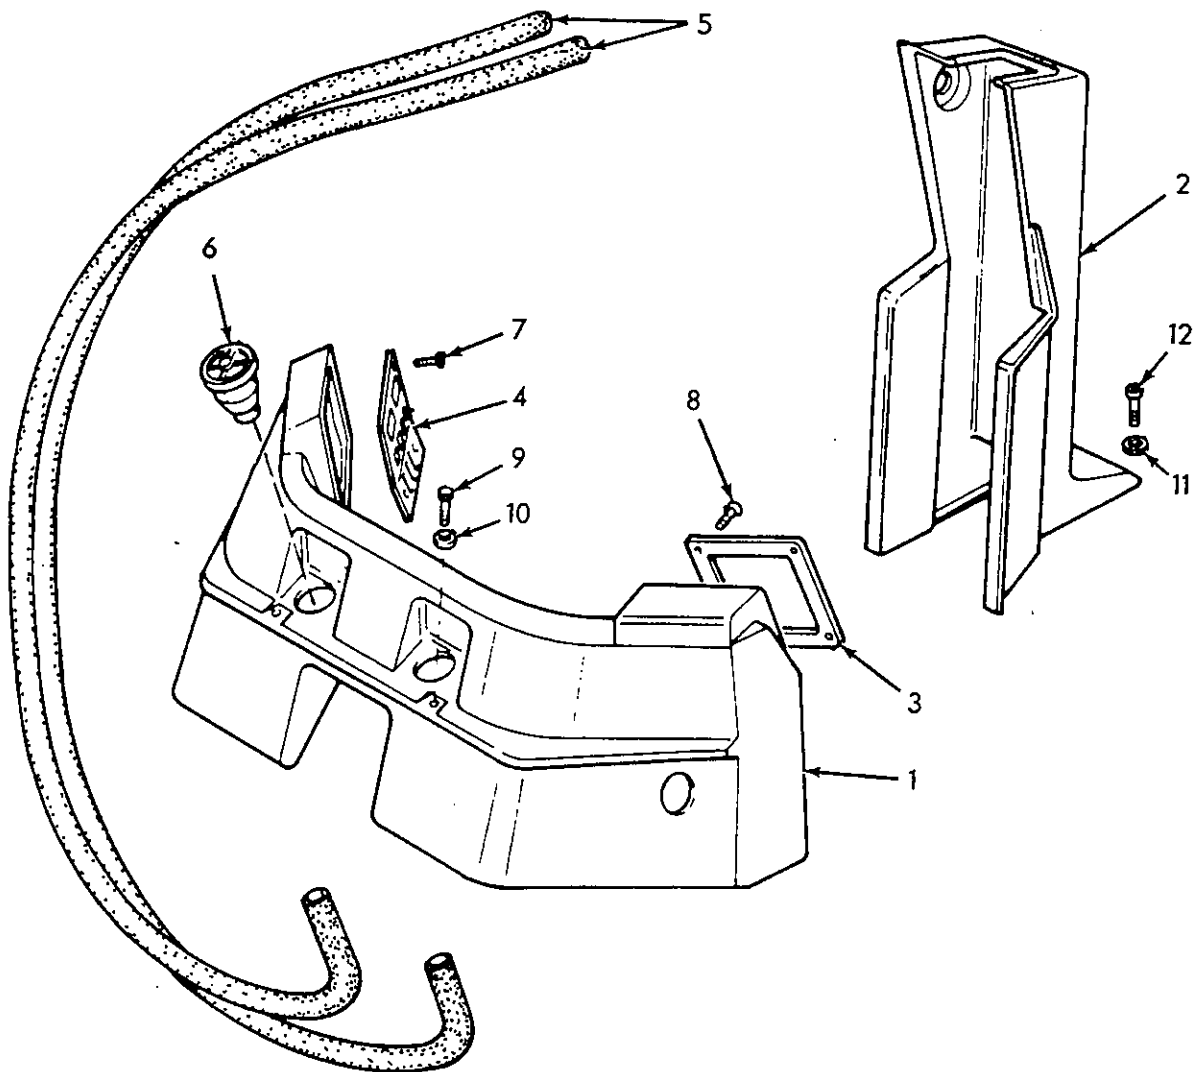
DASHBOARD & STEERING COLUMN PANELS
